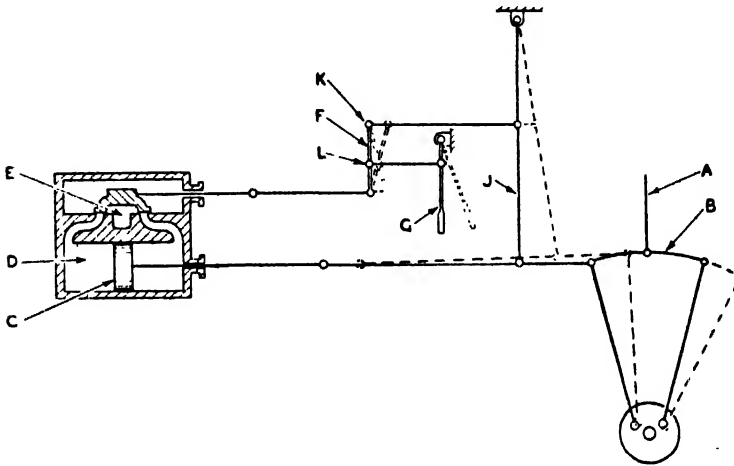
STEAM REVERSING GEAR—FOLLOW-UP WITH QUICK RESPONSE
